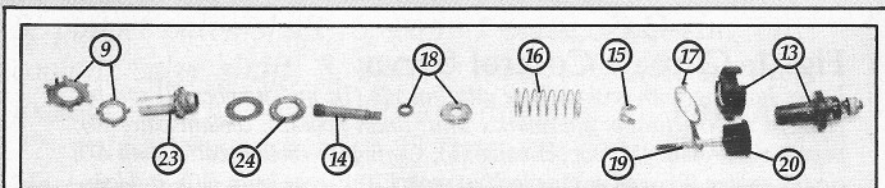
Water Valve: l. to r., two drive flanges (9); water valve drive nut (23); drive nut bearing (24); water valve shaft (14); O-ring and assembly washer (18); valve spring (16); water valve connector clip (15); poppet valve shaft (19); poppet valve lever (17); and water valve (13).
